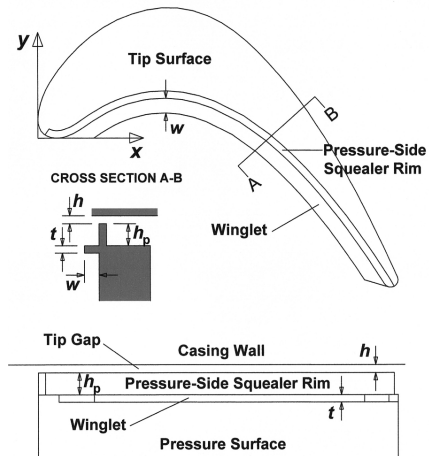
Pressure-side squealer tip equipped with pressure-side winglet to be tested
